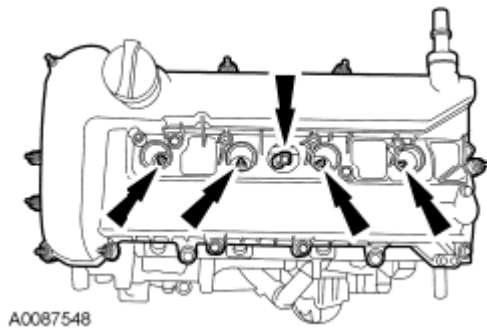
Locating Cylinder Head Temperature Sensor And Spark Plug
